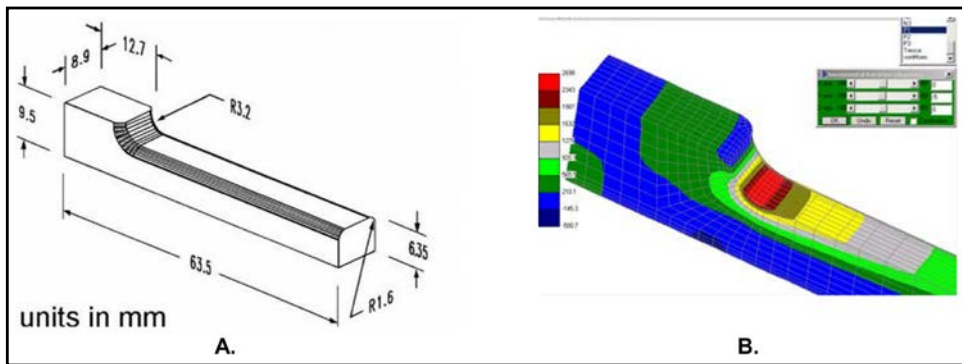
Bruggen specimen print dimensions (A), and the maximum loading stress profile imposed by the cyclic $R=0.1$ loading condition (B).
